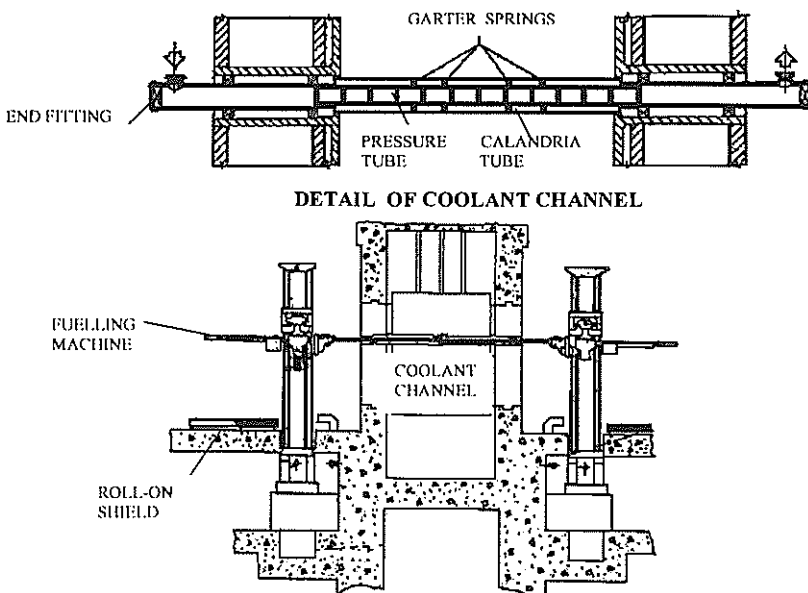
FUELLING MACHINE COUPLED TO COOLANT CHANNEL SUBASSEMBLY
